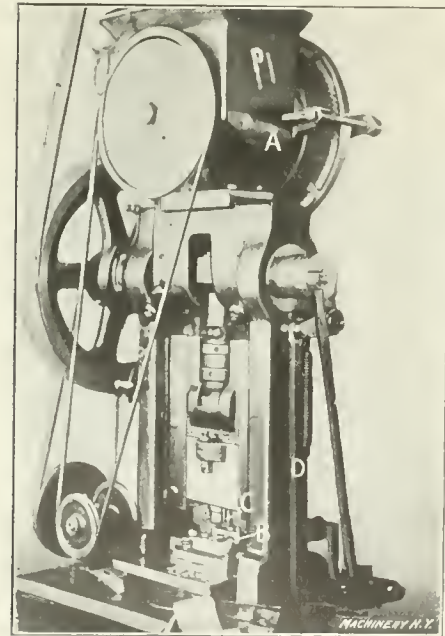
Automatic Machine for Flanging the Battery Pocket
